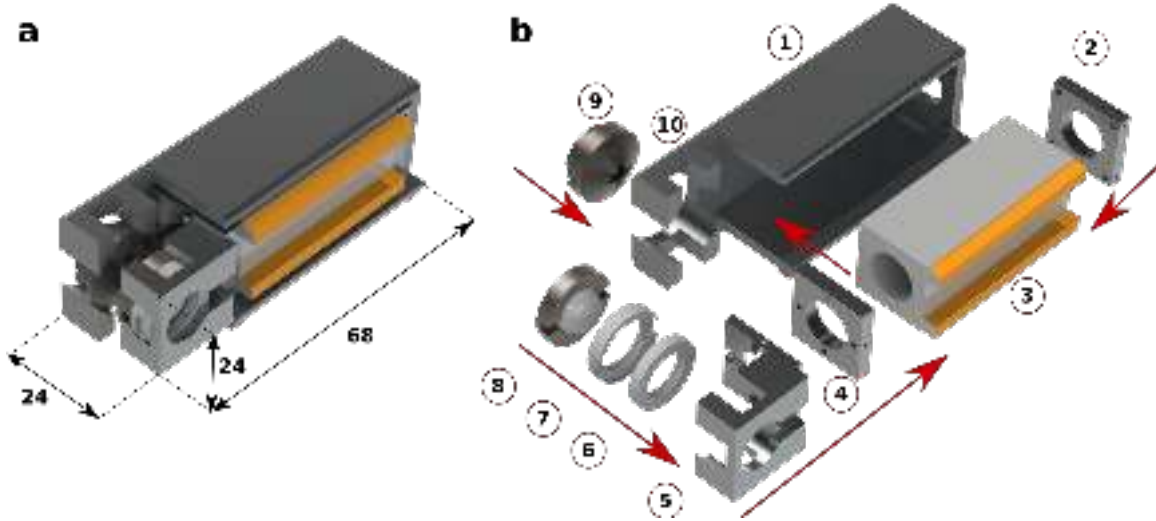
Three-dimensional model of the near-concentric cavity system. (a) The completed assembly view with system dimensions in millimeters. (b) The exploded view: 1 Cavity holder. 2 Back plate. 3 Stacked piezo. 4 Front plate. 5 L-shaped block. 6 Ring piezo. 7 PEEK spacer. 8 Right cavity mirror in the shield. 9 Left cavity mirror in the shield. 10 Spherical opening. The yellow bars indicate the piezo electrodes. Arrows show the direction of assembling parts.
